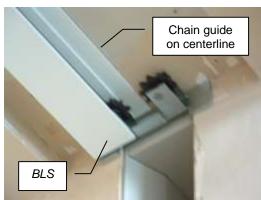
Chain Guide Loading Section and Sprocket Assembly
